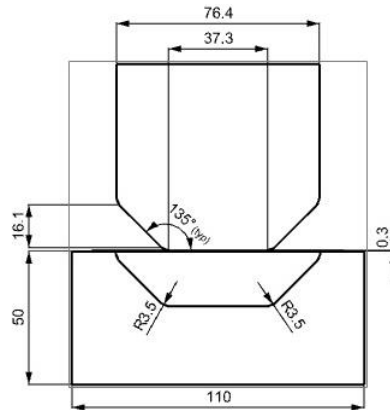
3-D draft model of assembly with sheet thickness 0.3 mm
